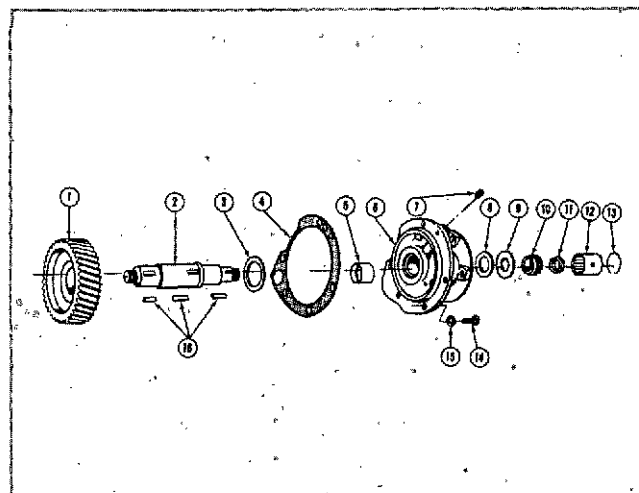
, V40909 Fuel pump/water pump/compressor drive
